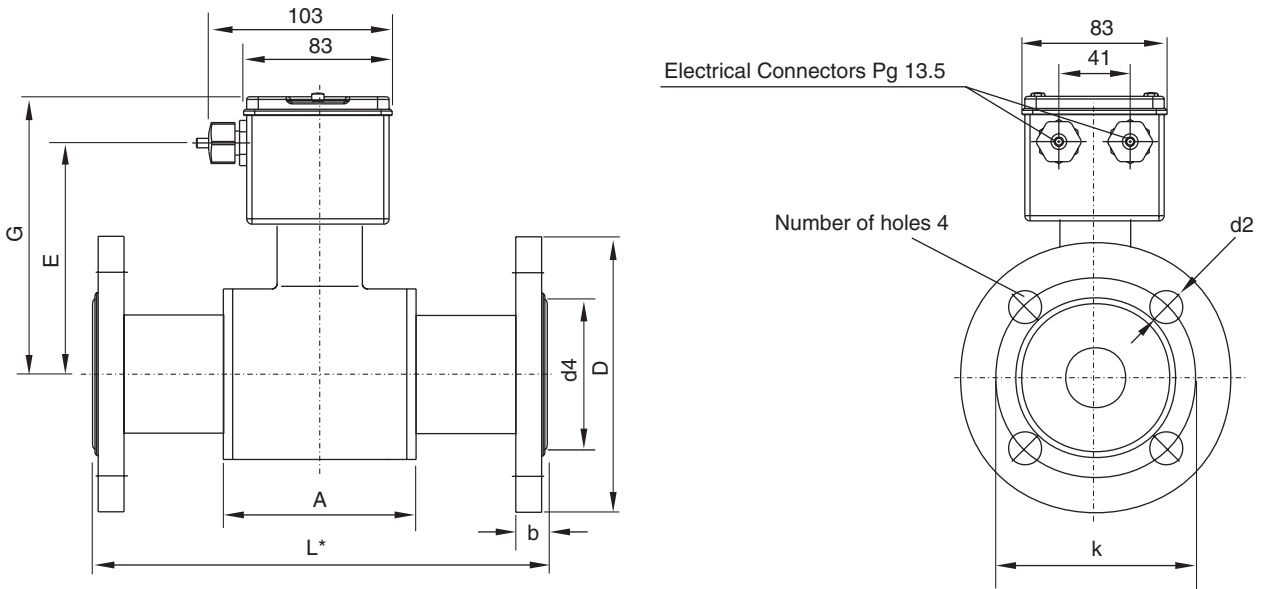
Dimensions Model DS21F, Stainless Steel, DN 3 to DN 40 [1/8" to 1-1/4"], Fixed Flanges
